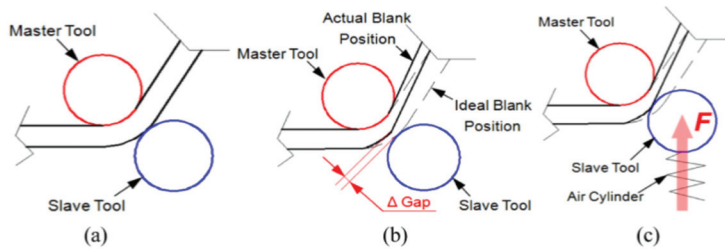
The E-DSIF process: (a) ideal position of forming tools, (b) loss of contact of slave tool and (c) supported slave tool approach to ensure a stable contact (reproduced with permission from [103]; copyright © 2015 Elsevier Ltd. All rights reserved).
